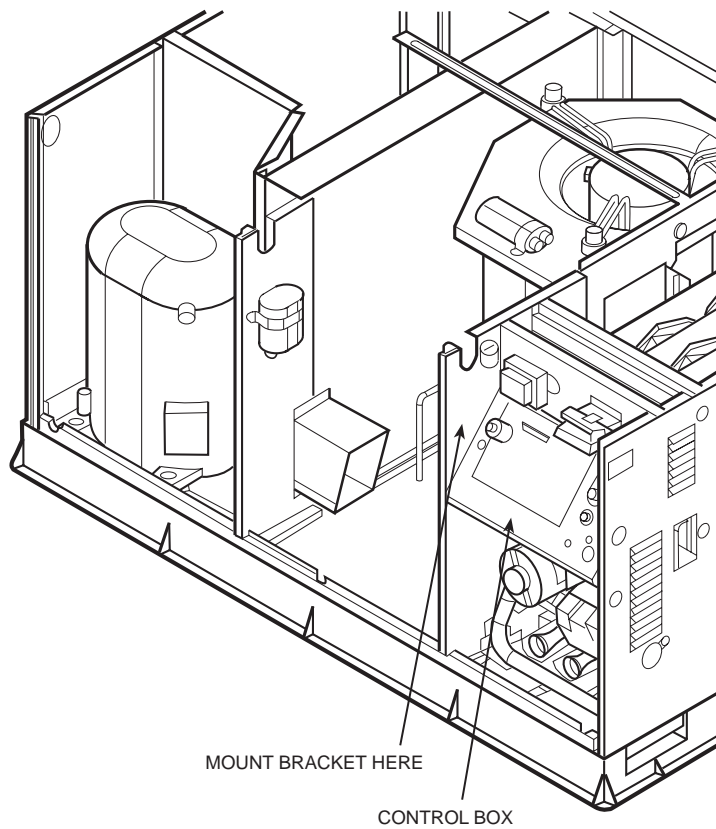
Thermistor Mounting Bracket Location (Gas Unit Shown)
